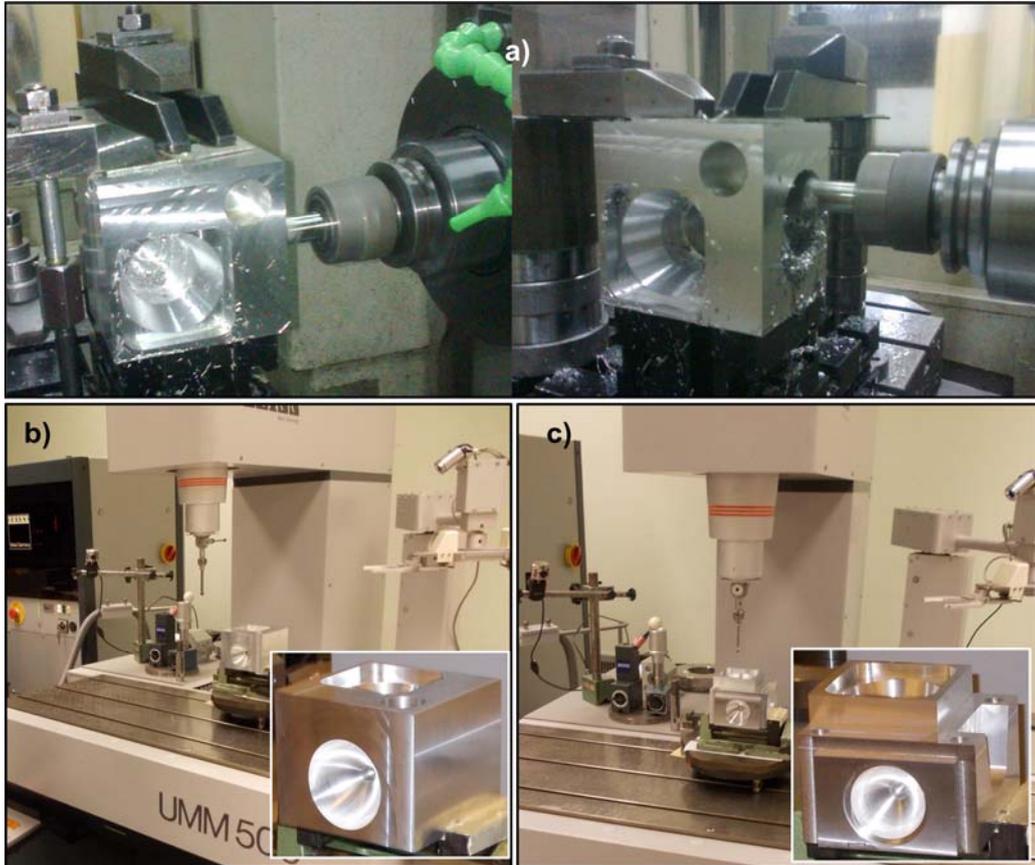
The two prismatic parts: a) machining, b) measuring part no. 1, c) measuring part no. 2
